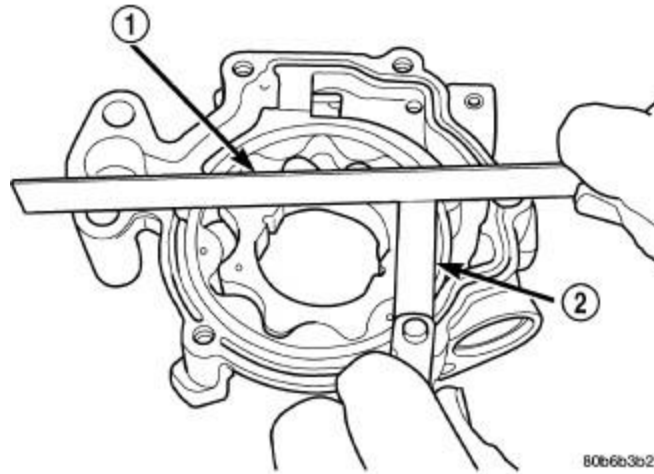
Measuring Clearance Between Outer Rotor And Body
